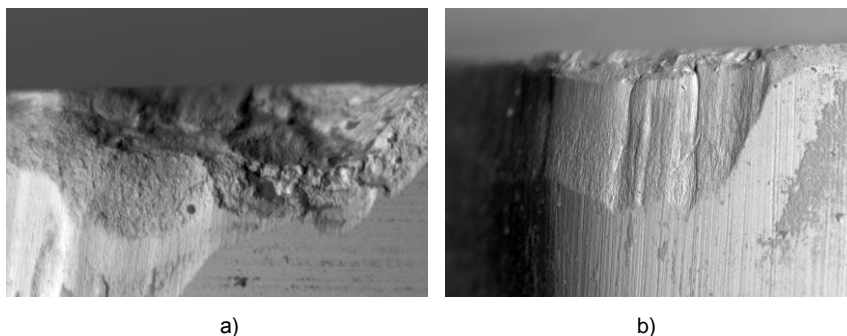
The nature of brittle fracture and wear of the contact pad of the main back surface of the T15K6 hard alloy cutting plate:
